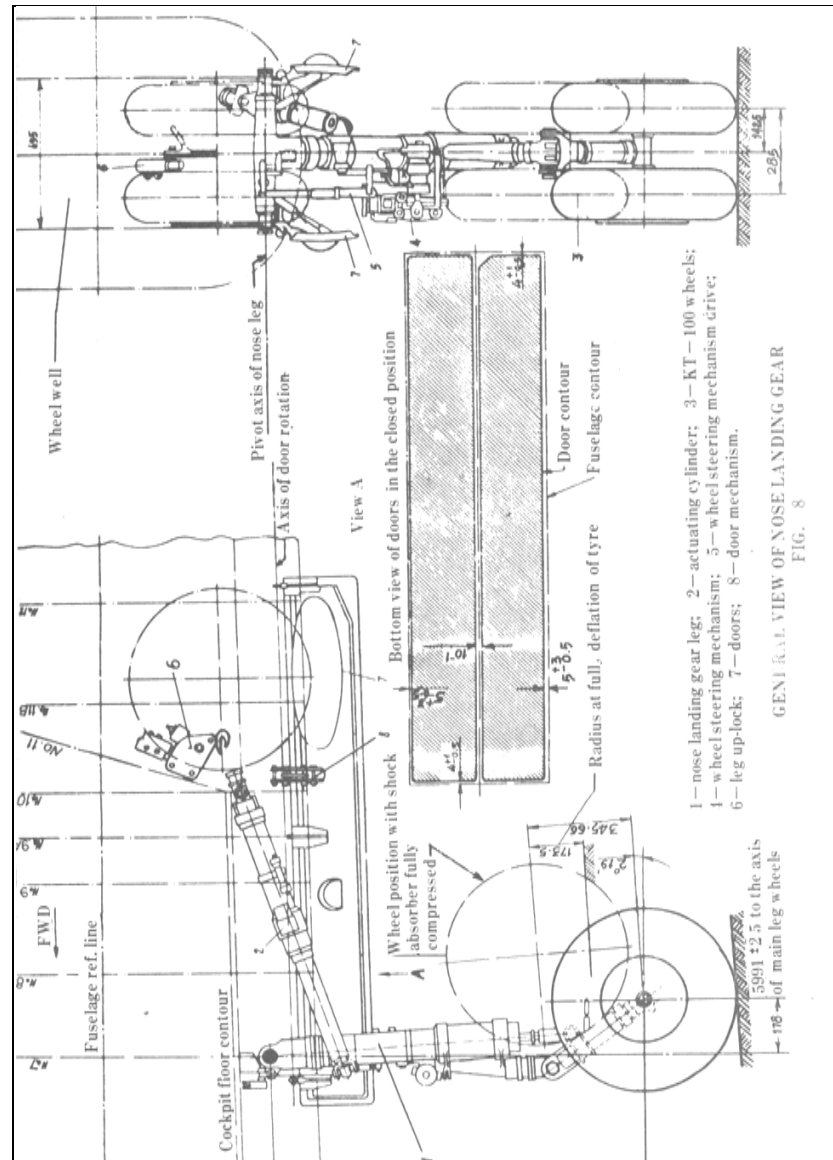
Installation and assembly details of the NLG^[15,24]
